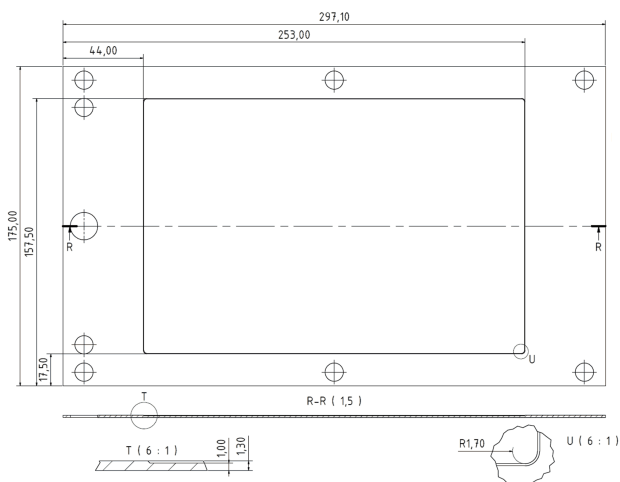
Dimensions of the manifolding bottom plate: Top view of the manifolding bottom plate. All dimensions are in mm. (Todt 2011)
